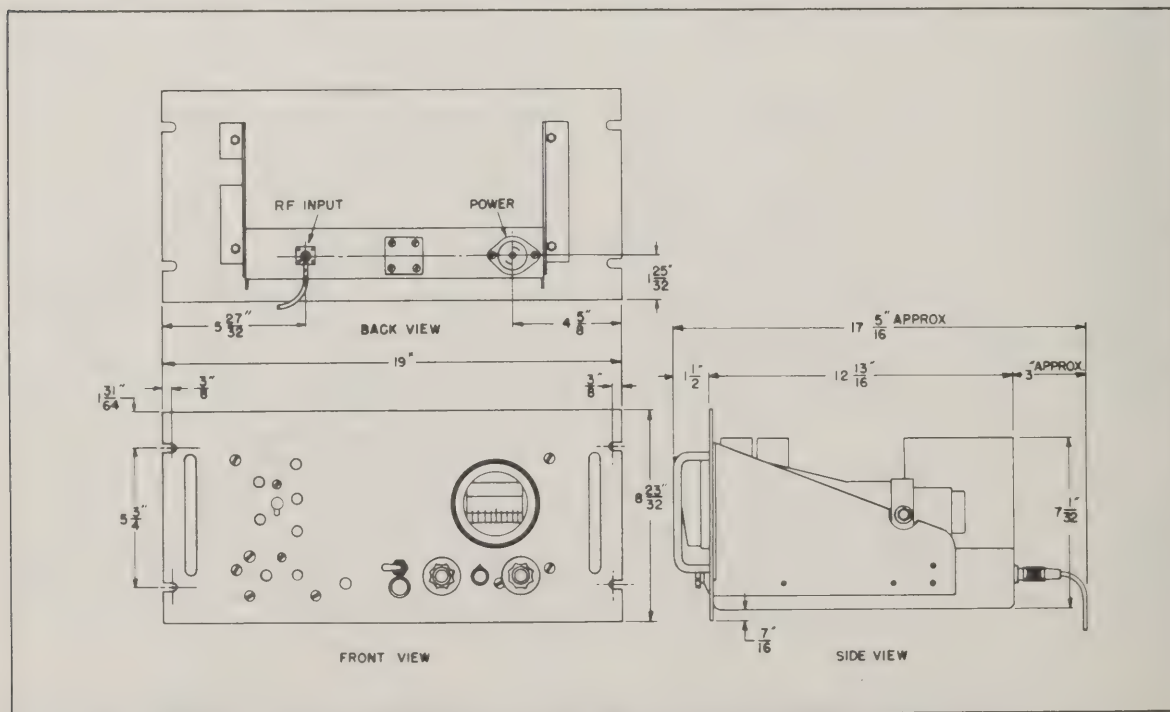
Outline Dimensional Drawing, Model SA-3, Type T-2000NC, Rack Mount.
